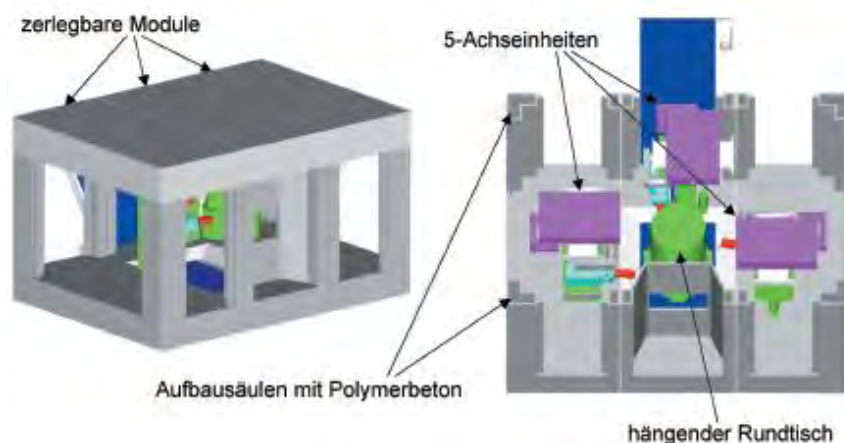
Design of a special mobile machine for machining²¹⁰
